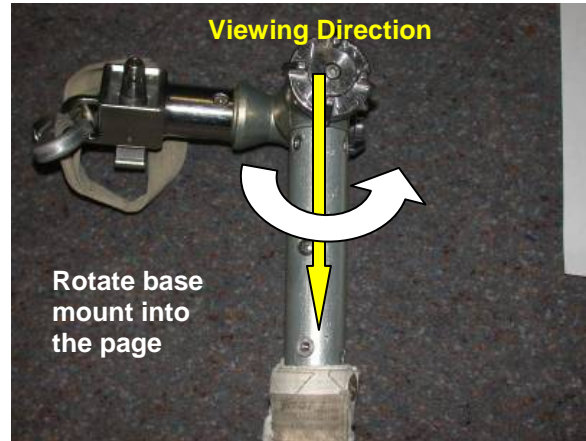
Rotate Base Mount Assembly Counter Clockwise 180° CCW.
